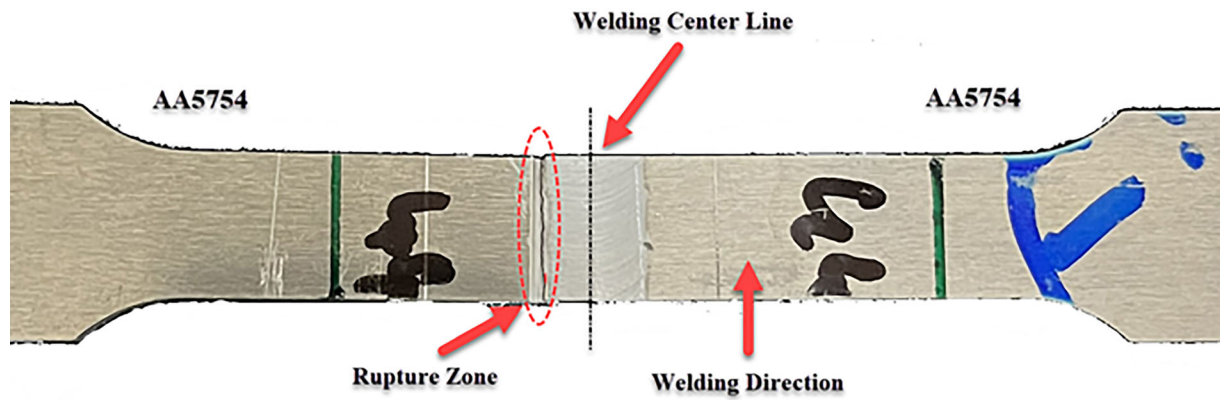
Fracture region of AA5754 specimens under tensile testing
